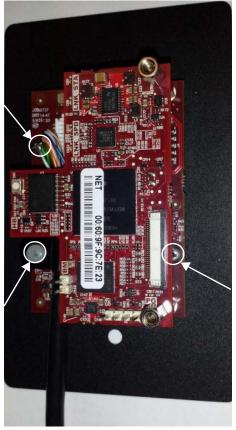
Remove the three screws using a Phillips-head screwdriver
